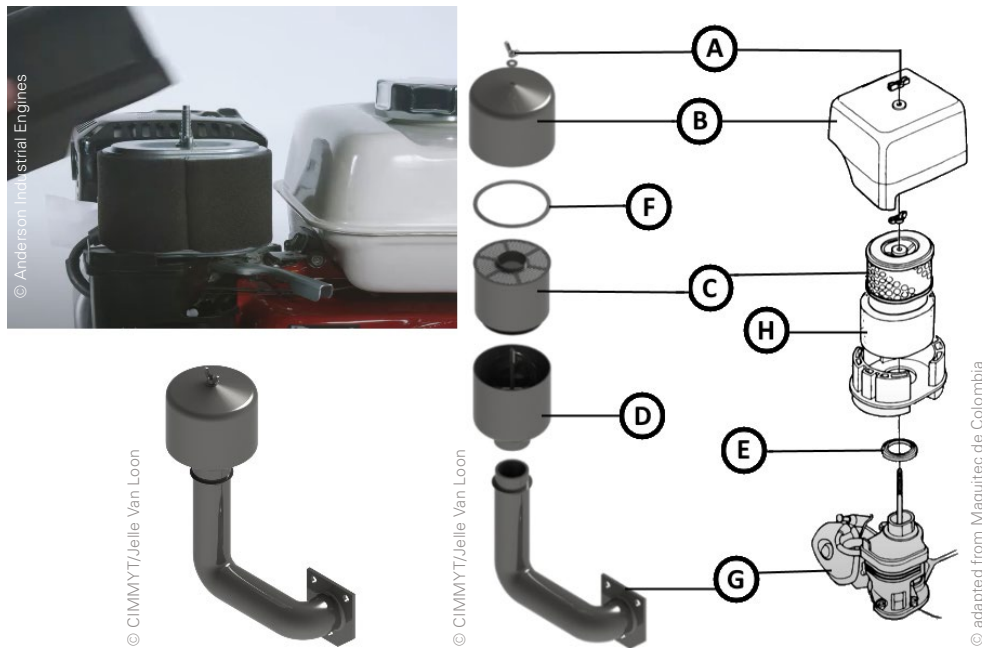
Air filter location in petrol engines (upper left) and diesel 2WT engines (lower lever), and parts with (A) wingnuts, (B) exterior housing, (C) air filter, (D) interior housing, (E) oil gasket and (F) O-ring, (G) engine mounting structure and (H) foam cover.
